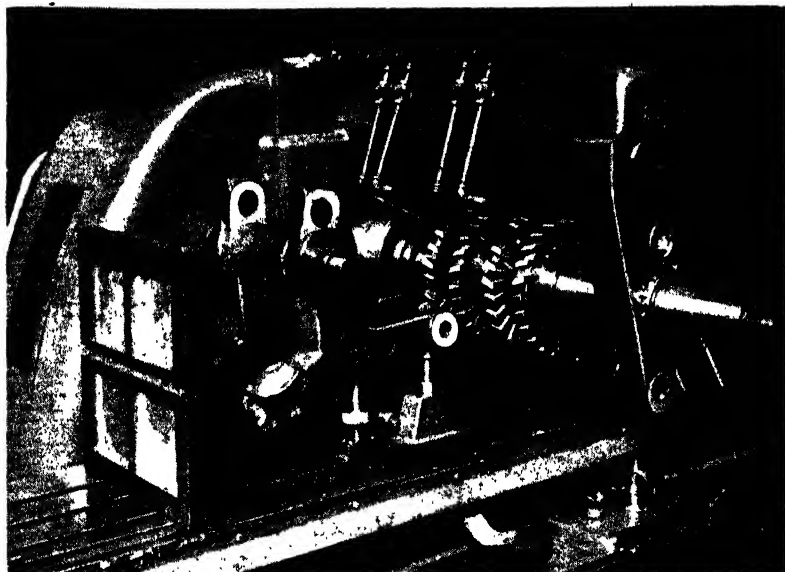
Milling Operation on Inner and Outer Bracket Faces
